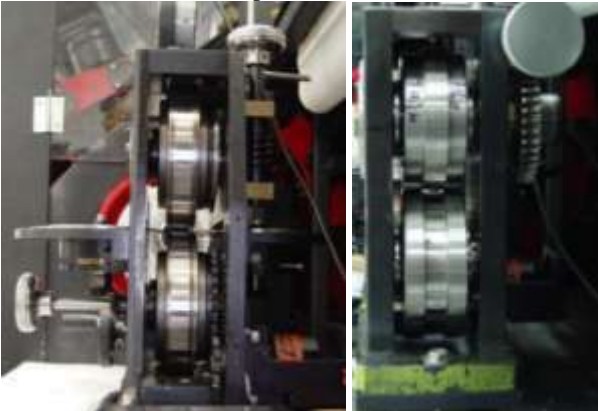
Cable forming fixture for the rectangular cable geometry (left) and keystoneed tooling (right).
